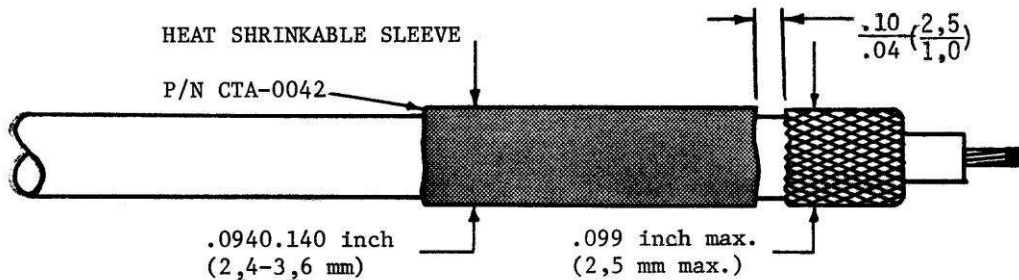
RG-COAXIAL CABLE DIMENSIONS FOR D-602-0094 AND D-602-0095 CONTACTS
